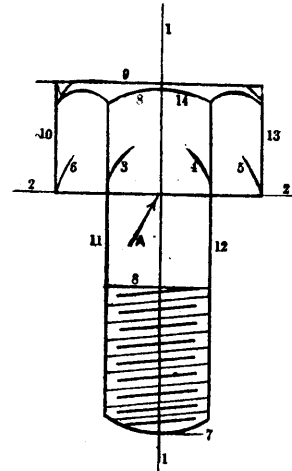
DRAWING A BOLT WITH HEXAGONAL HEAD.
